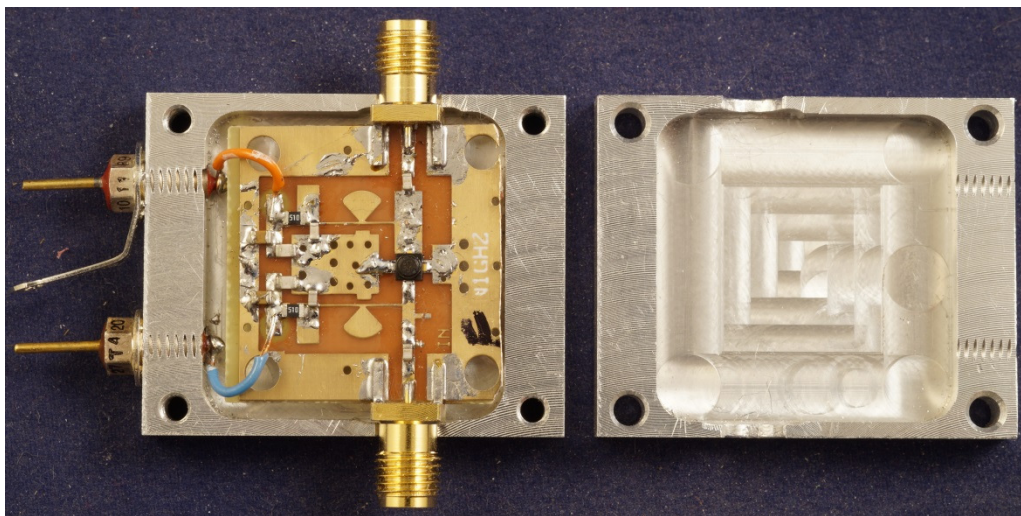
Clamshell housing to reduce stress and flexing of thin PC board
